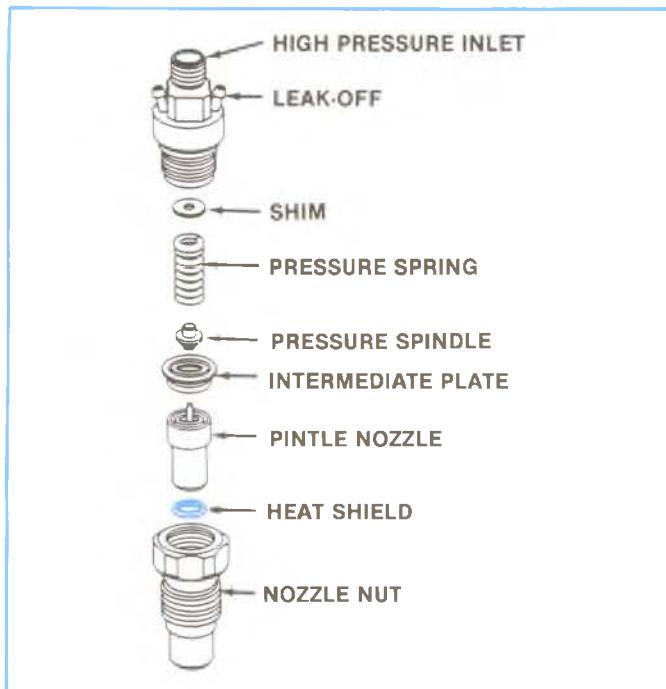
, Nozzle Holder Assembly, Exploded View.
